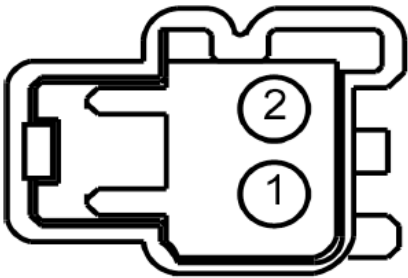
Right Front Seat Cushion Heater Connector End View (C334)
